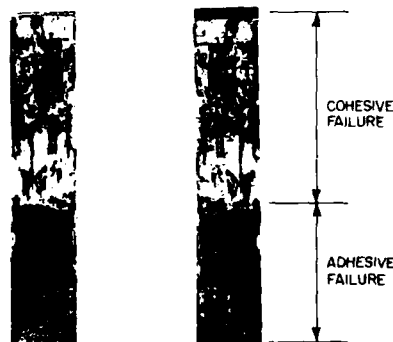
Debonded surfaces of cracked-lap-shear specimen.
